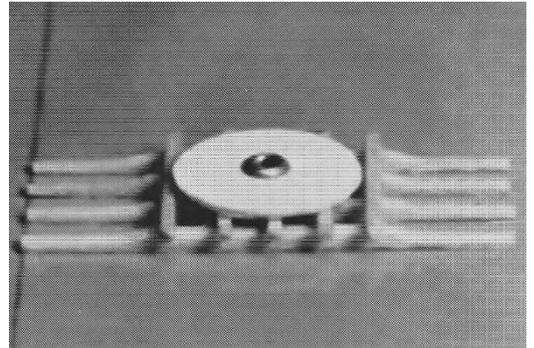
Assembling the fifth using an eyelet will provide a free turning assembly.
